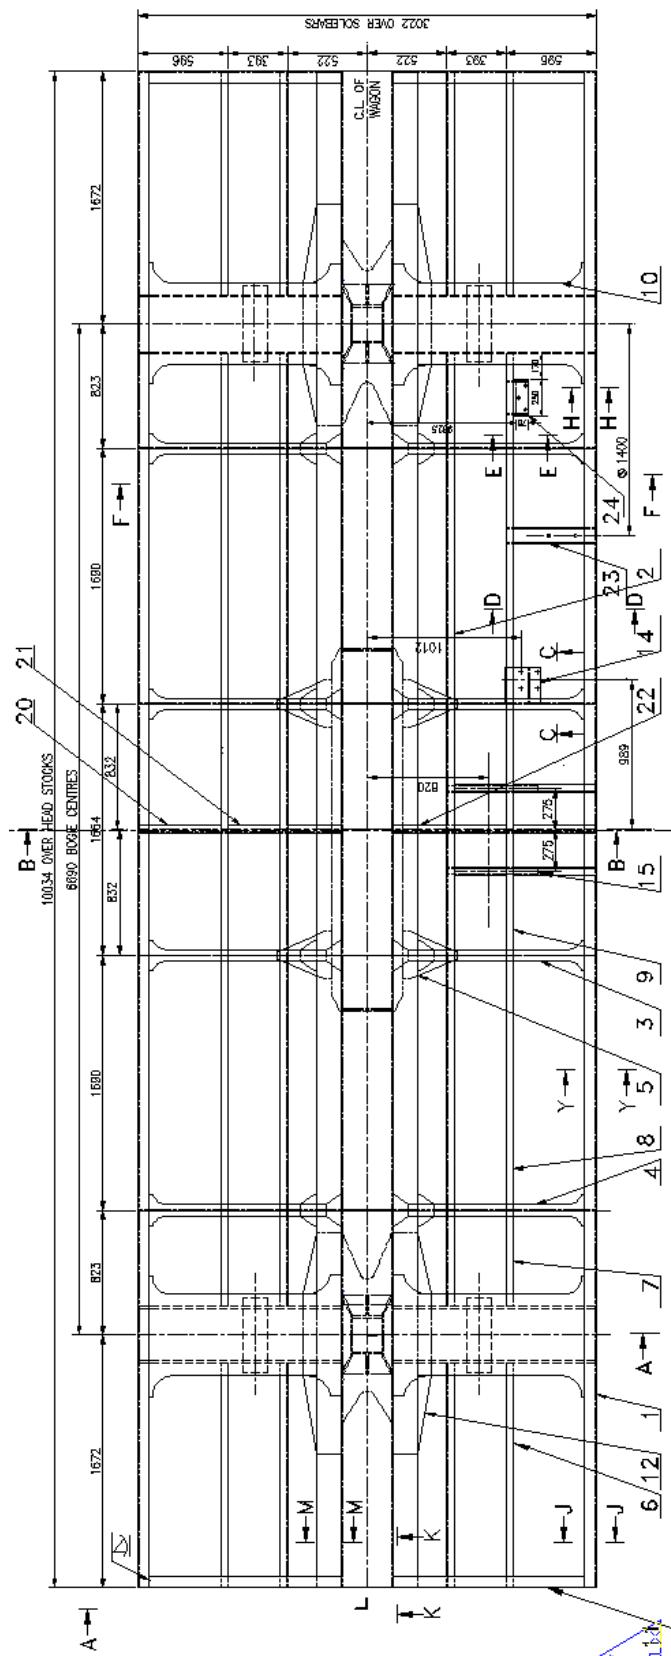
BOGIE OPEN WAGON TYPE 'BOXNHL (MBS)' UNDERFRAME ARRANGEMENT
